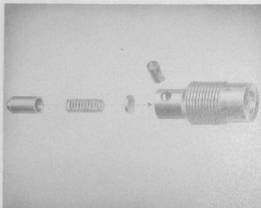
Assembling Vane Motor Jack-Screw—Composite View
